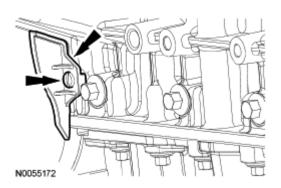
Locating Pin-Type Retainer Courtesy of FORD MOTOR CO.
